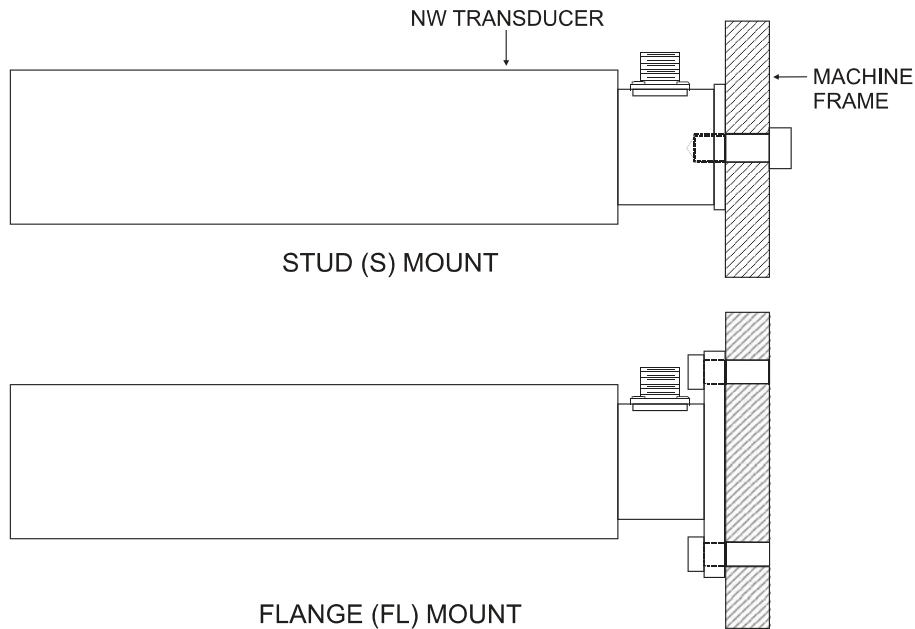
NARROW WEB TRANSDUCER MOUNTING STYLES
